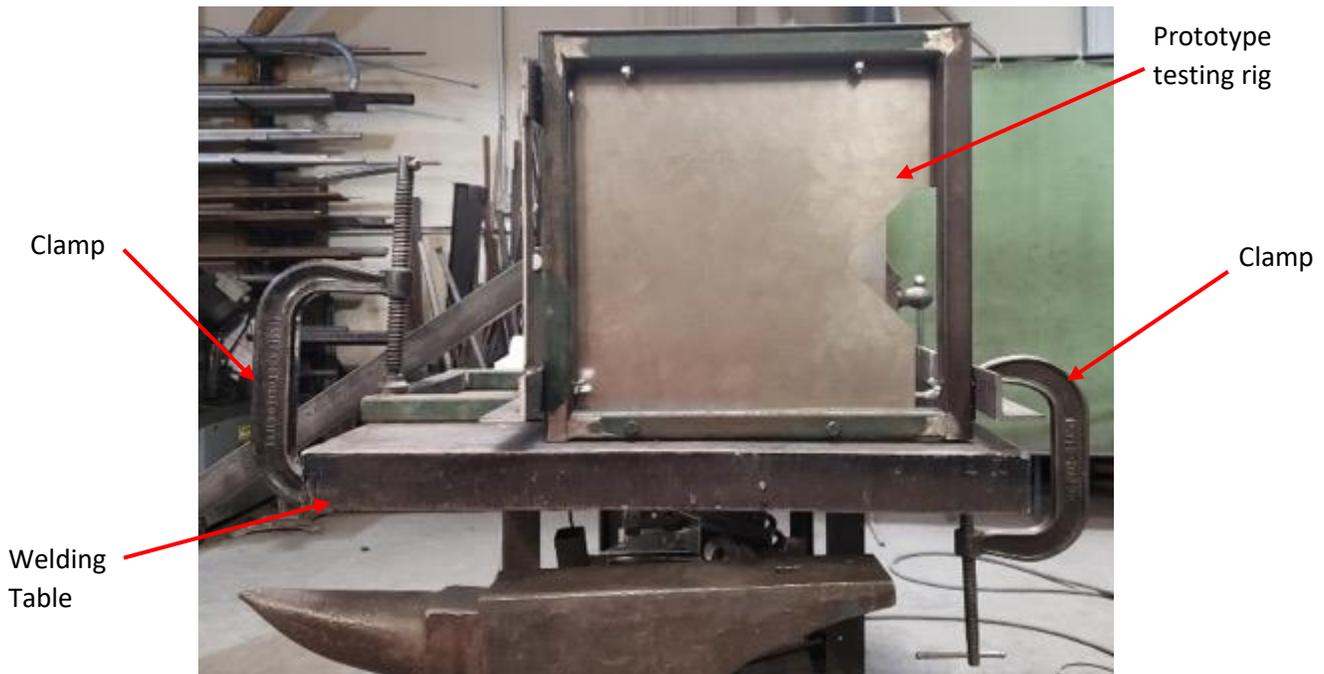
Side view of prototype testing rig clamped to welding table
